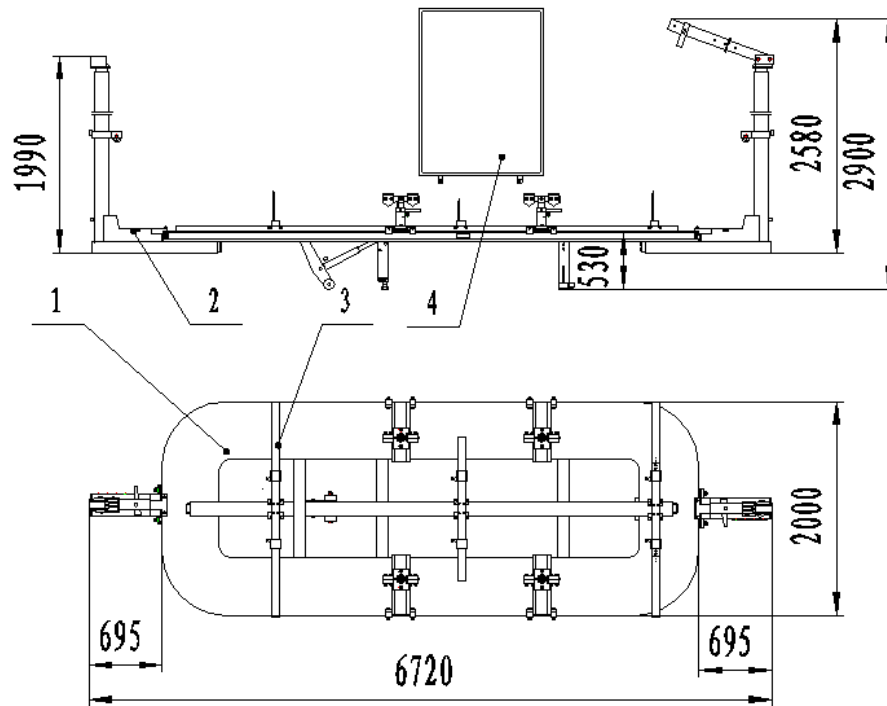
Universal Collision Repair Equipment EE-CRT3500
